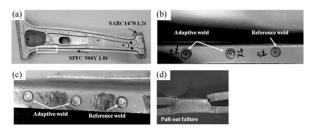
Details of validation test (a) Sheet combination, (b) Weld spot, (c) Plug failure (d) Nugget image of adaptive weld
